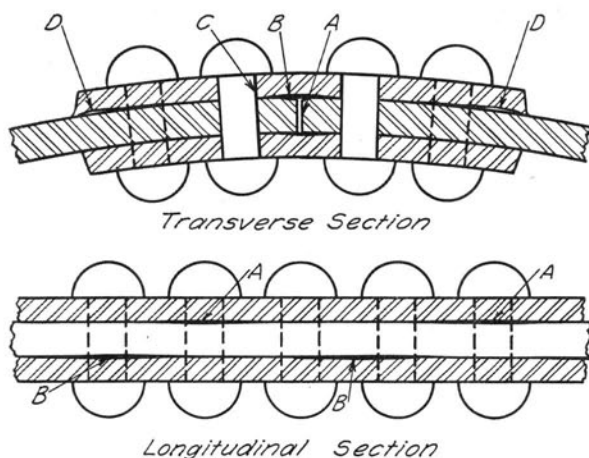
SECTIONS THROUGH BUTT SEAM SHOWING POINTS OF POSSIBLE CONCENTRATION
